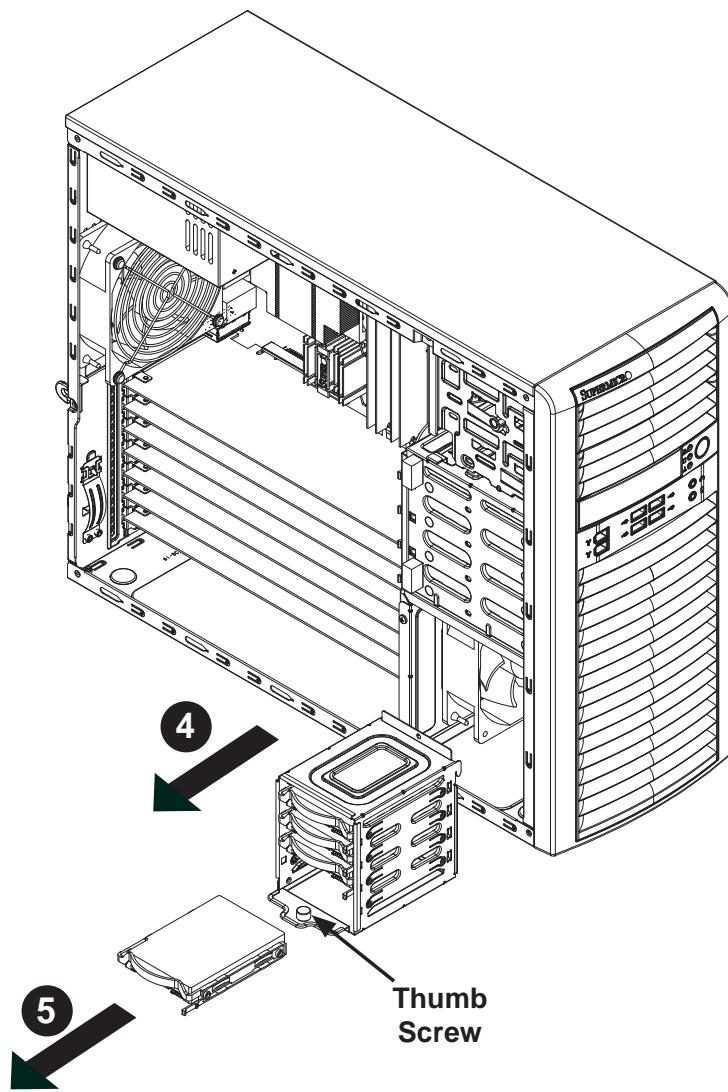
Installing a Hard Drive Carrier into the Hard Drive Cage
